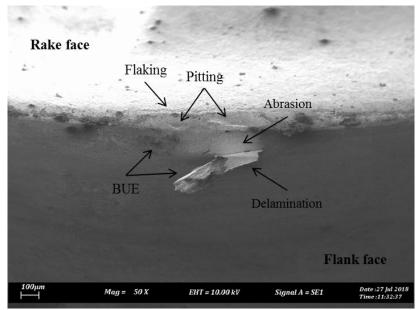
Flank wear at cutting condition, Vc, 20 m/min; 0.1 mm/tooth; dry-cut. Flaking, pitting, delamination and BUE form on the flank face near the DOC line.
